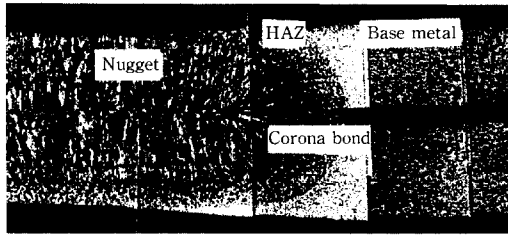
Cross section of spot welding zone ( $\times 25$ ).
